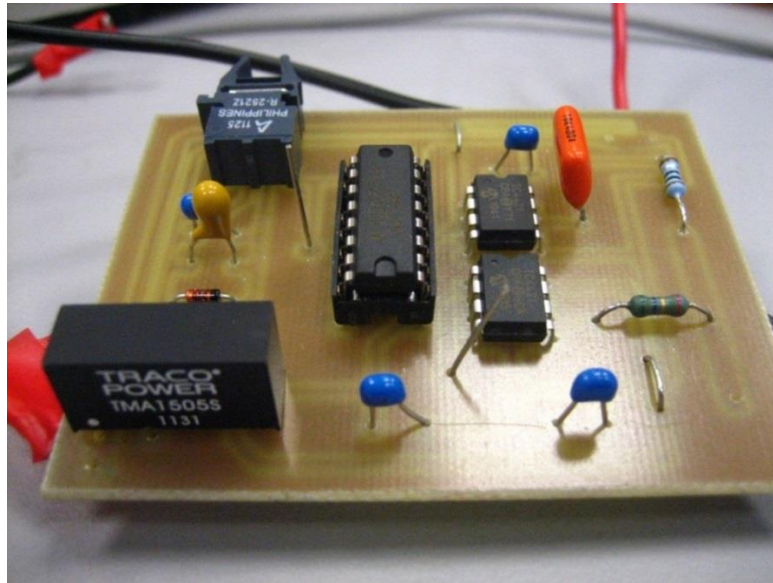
PCB fabrication of the dual-source DC power supply base driver
